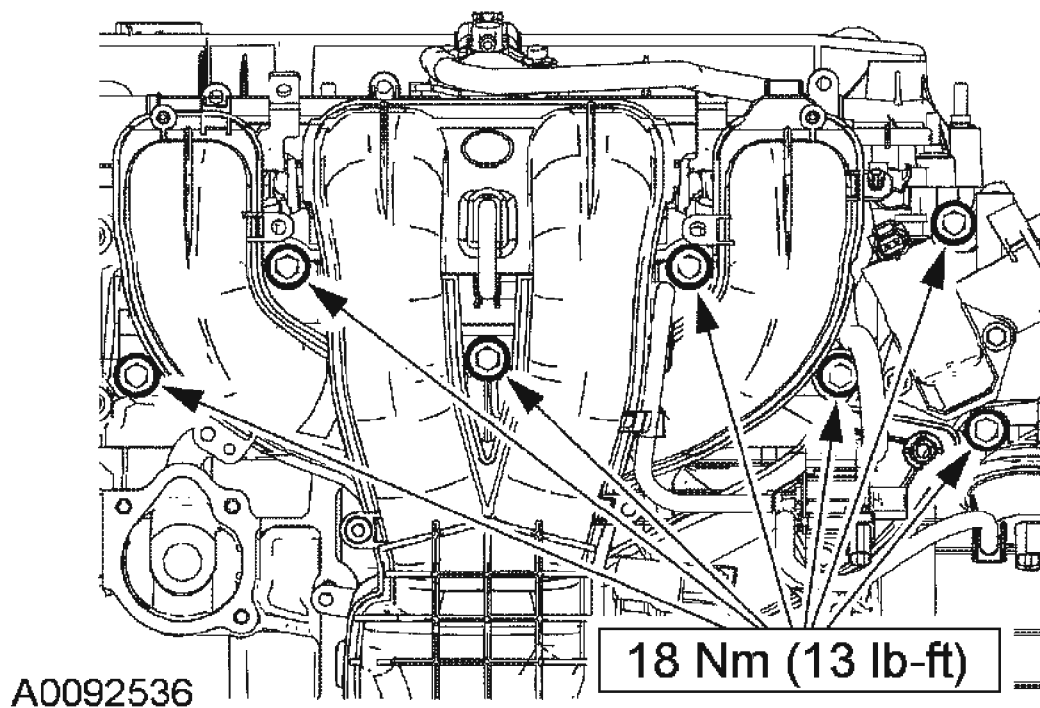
Installing Intake Manifold And Seven Mounting Bolts
